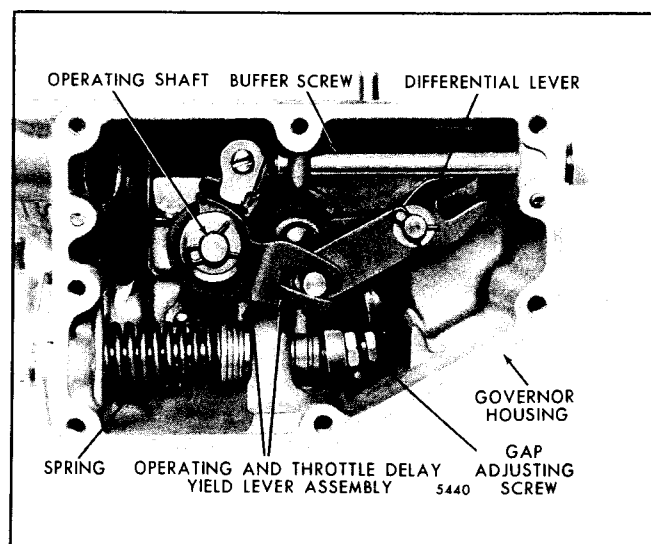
Throttle Delay Yield Lever (6V Engine)
